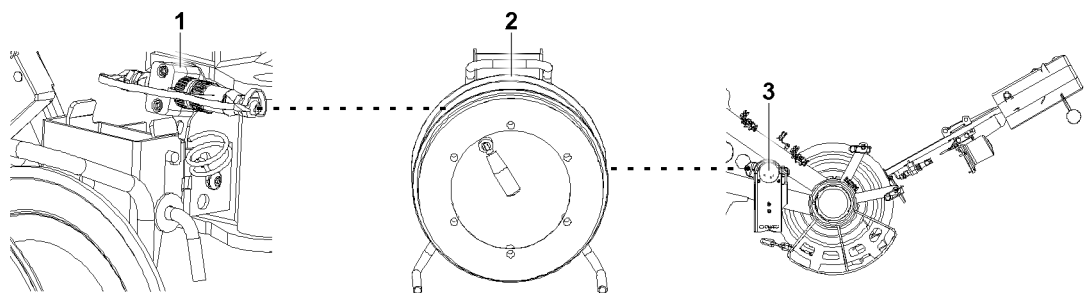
Establishing the electrical connection to the camera on the auxiliary boom
